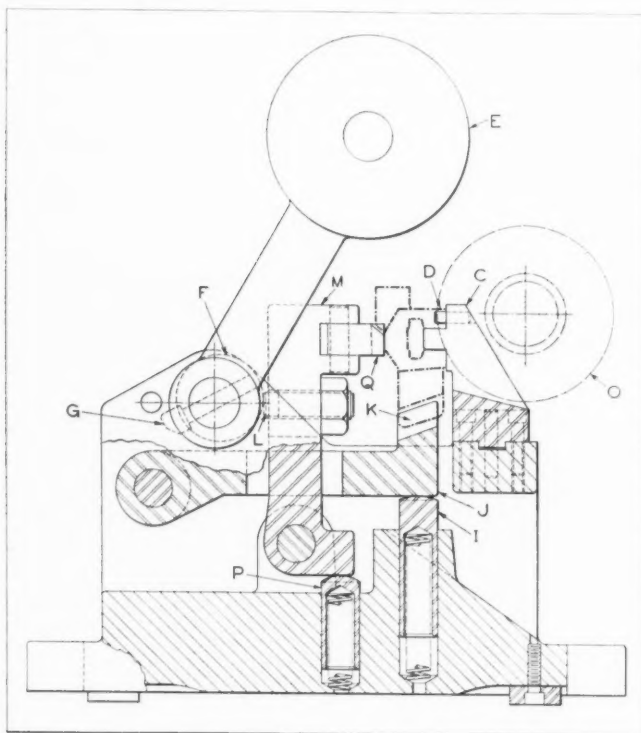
Fixture Designed for Milling Slots *N*, Fig. 1, in Two Types of Shifter Yokes
